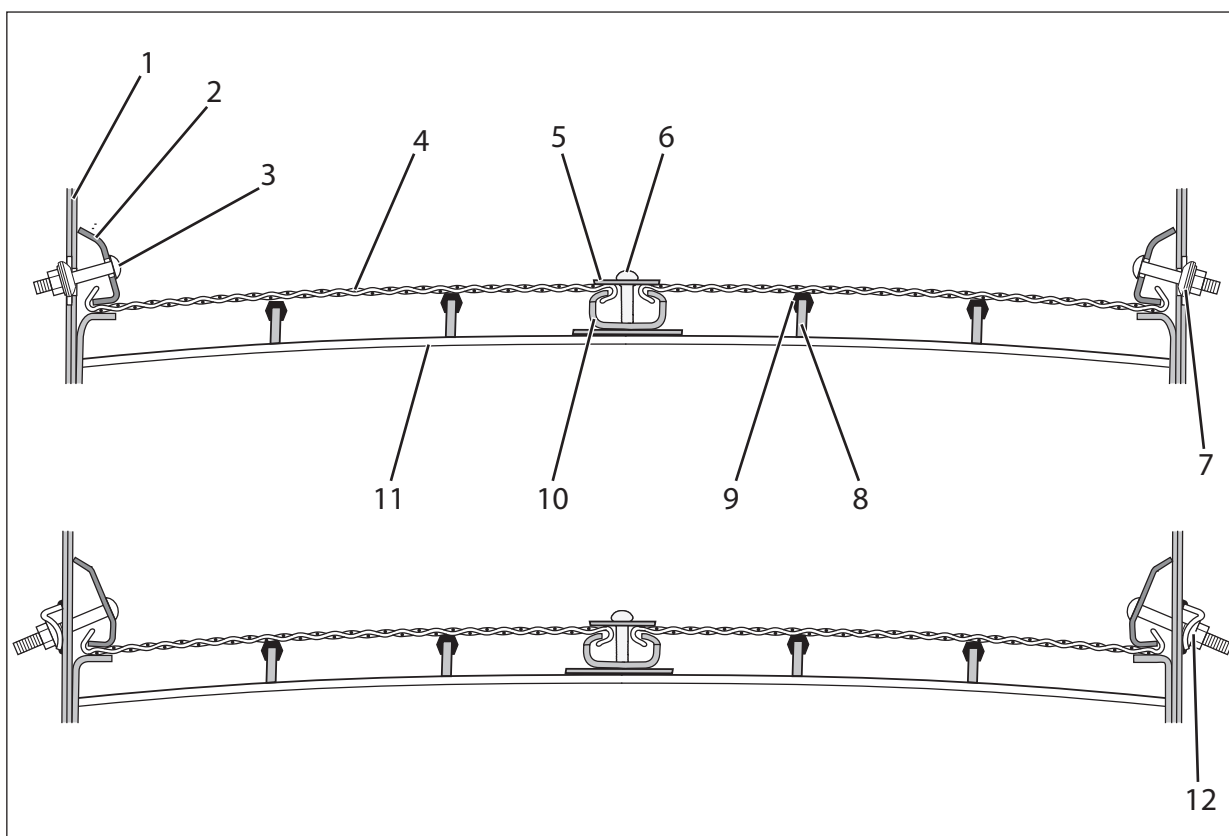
Cross Sectional View of a Divided Deck Screen
